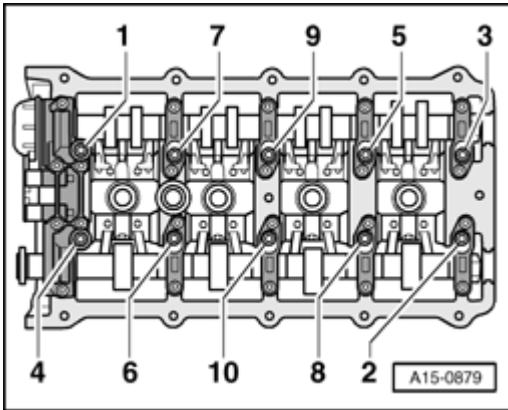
Loosening Cylinder Head Bolts In Sequence
